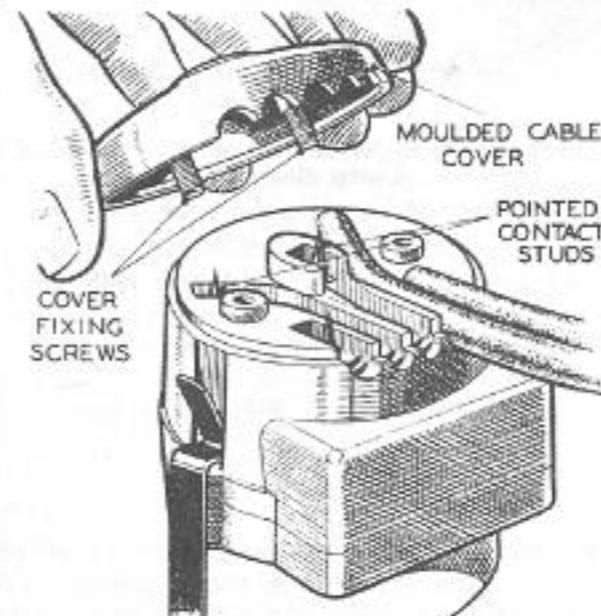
Fitting High Tension Cables to Distributor Cap.
